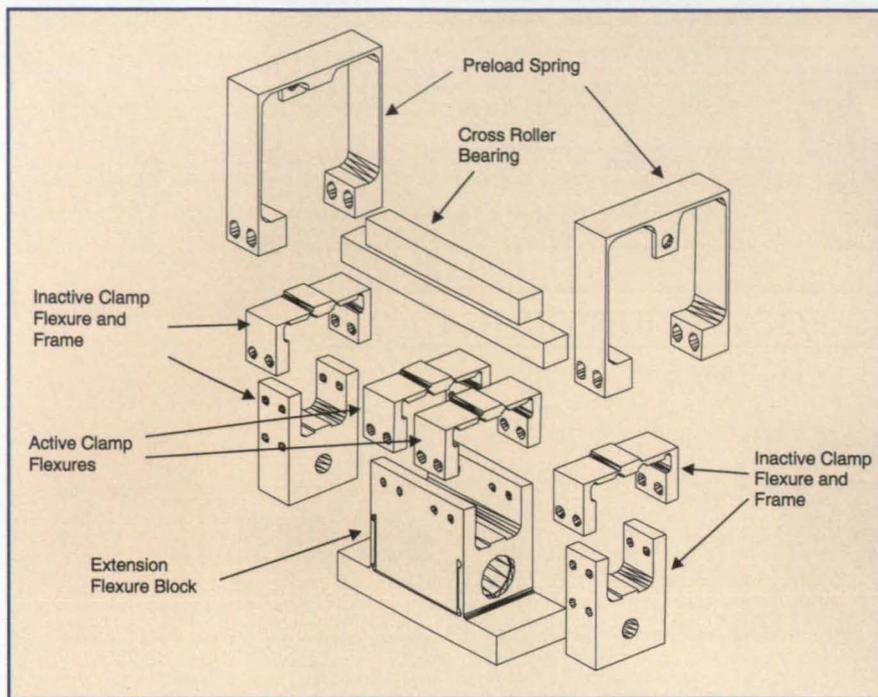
Exploded view of the prototype NGST INCHWORM assembly (PZT stacks not shown).
